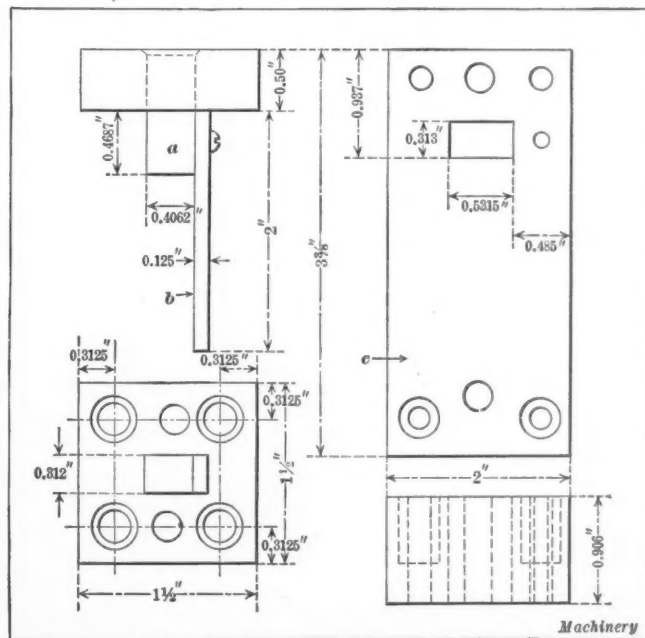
Chute used on Socket Die for discharging Finished Parts
